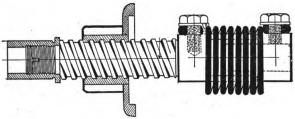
Bendix Drive; Screw, Spring and Pinion.
